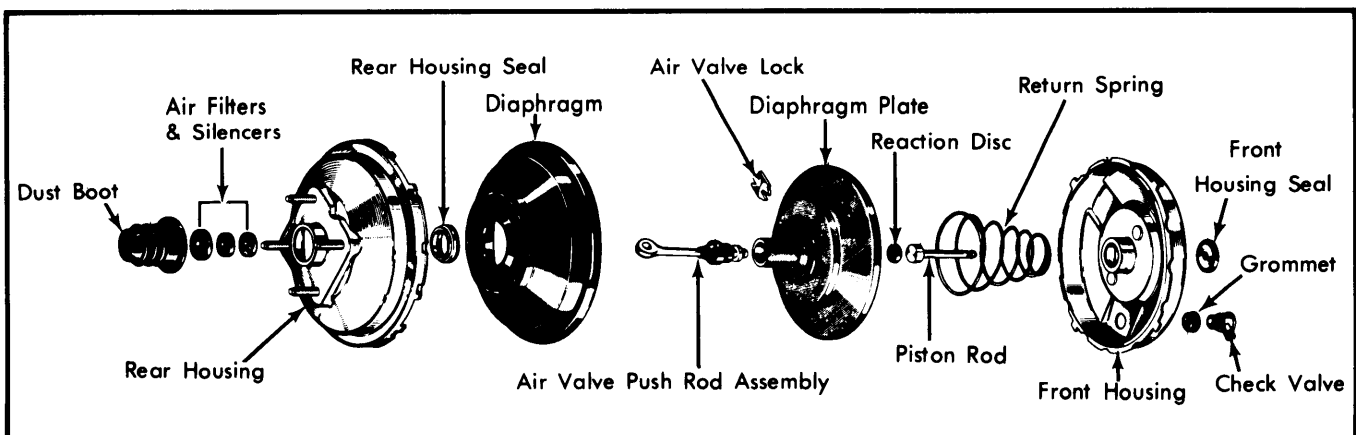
Exploded View of Bendix Single Diaphragm Assembly
